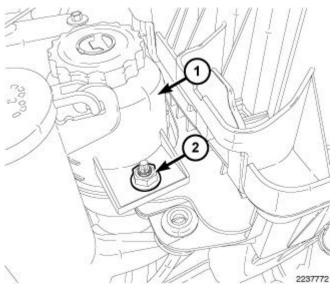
Intake Air Housing Courtesy of CHRYSLER LLC
